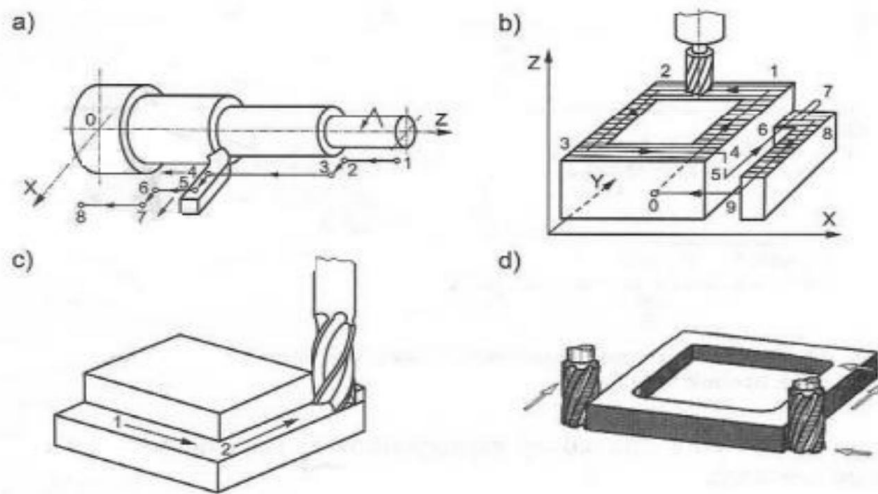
Examples of straight line control system: a) turning multistage shaft b) milling plane-parallel, c) counterboring, d) machining the sides contours, [32]
